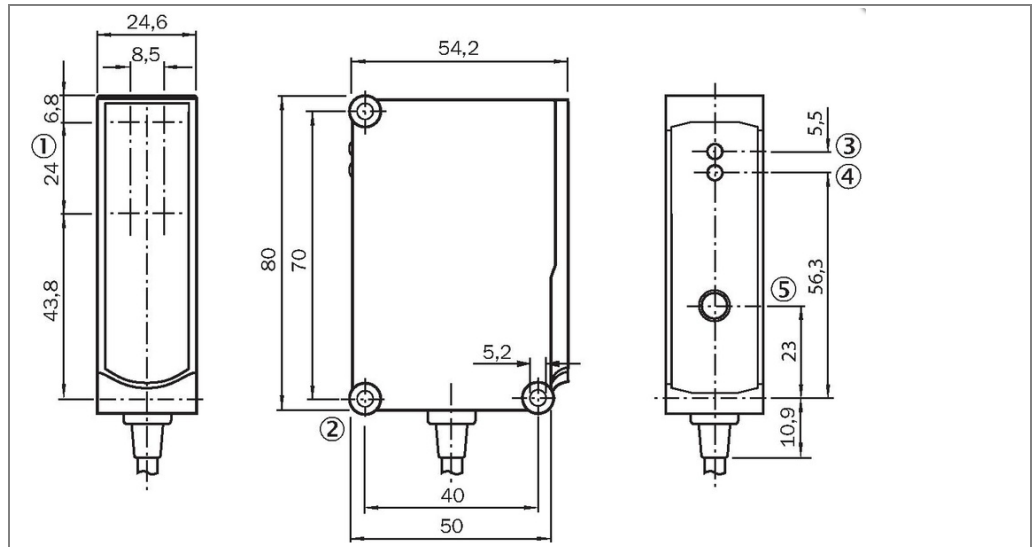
Dimensional drawing of WL27-3 photoelectric retro-reflective sensor
